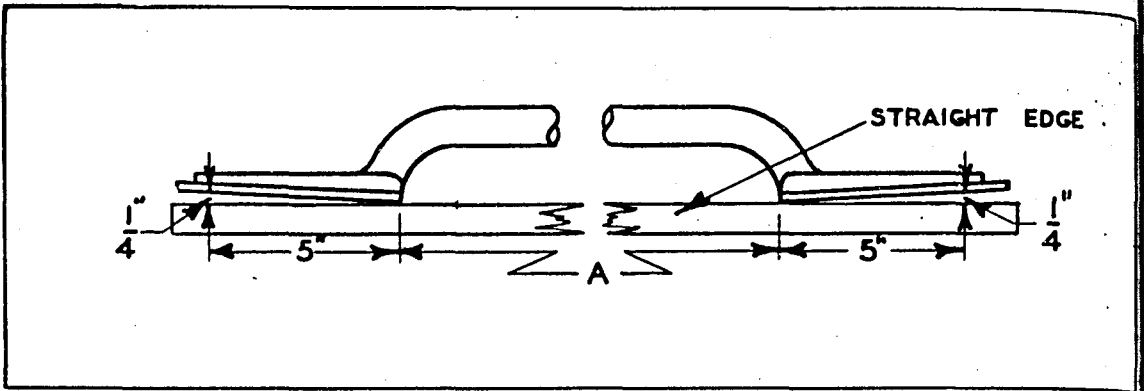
METHOD OF CHECKING AN ADZING GAUGE .
